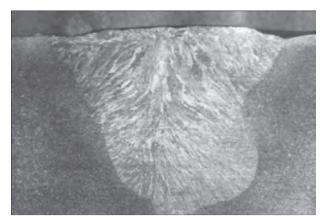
Macrostructure (×2.1) of welded joint of 15Kh1M1F steel
